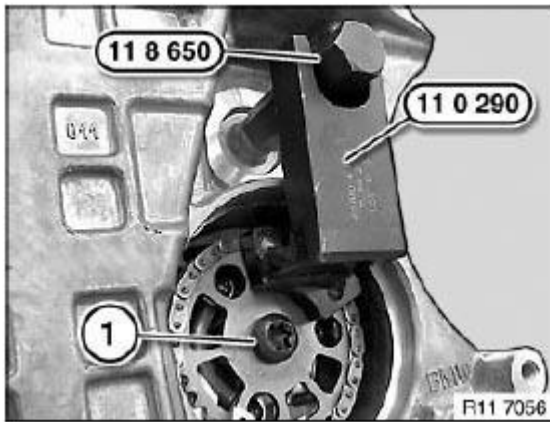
Positioning Special Tool 11 0 290 On Sprocket Wheel And On Special Tool 11 8 650
